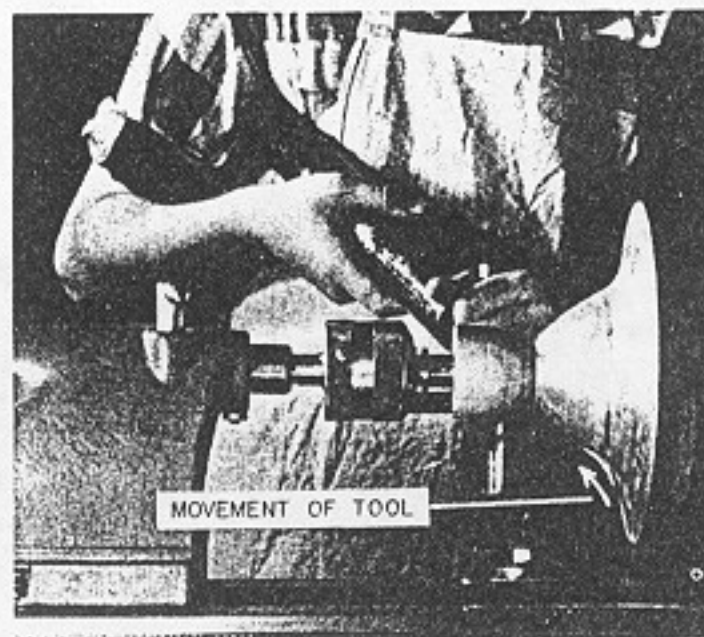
The spinning tool is guided with the hands, arms, and body. The pressure of the tool against the metal causes it to form or flow snugly over the chuck. Note the movement of the tool as indicated by the arrow.
